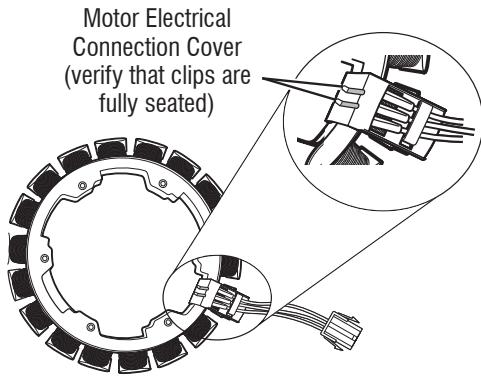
Removing Shifter Coil and Checking Motor Electrical Connection
